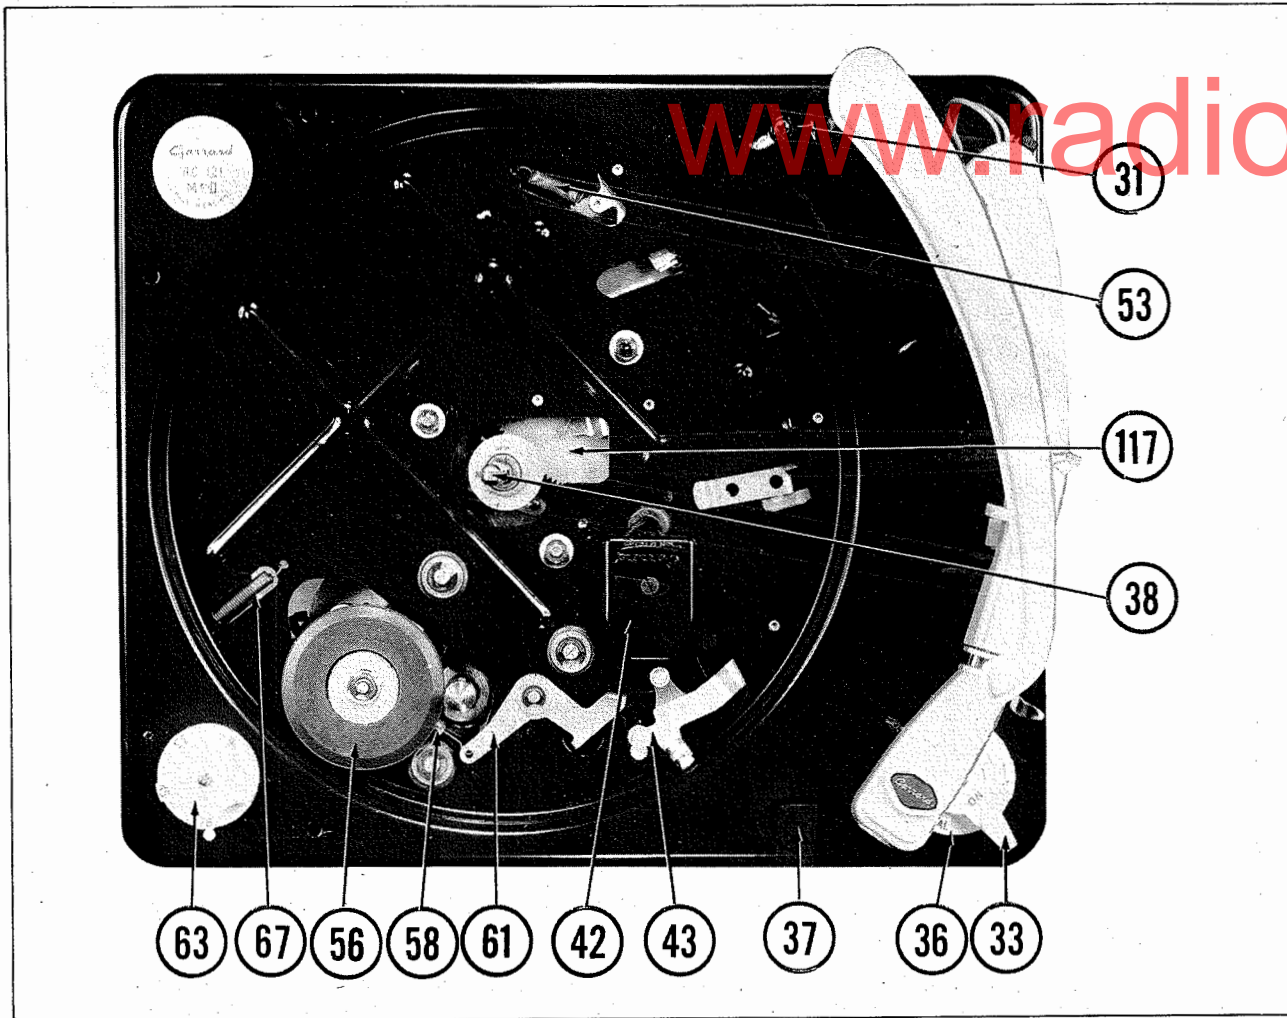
CHANGER MECHANISM WITH TURNTABLE REMOVED
